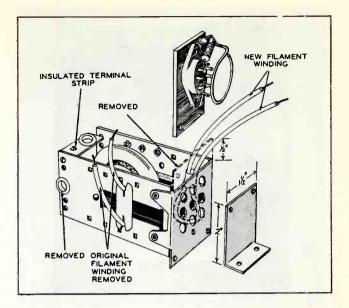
Construction Detail of Horizontal Transformer and HV Rectifier Mounting Brackets.
